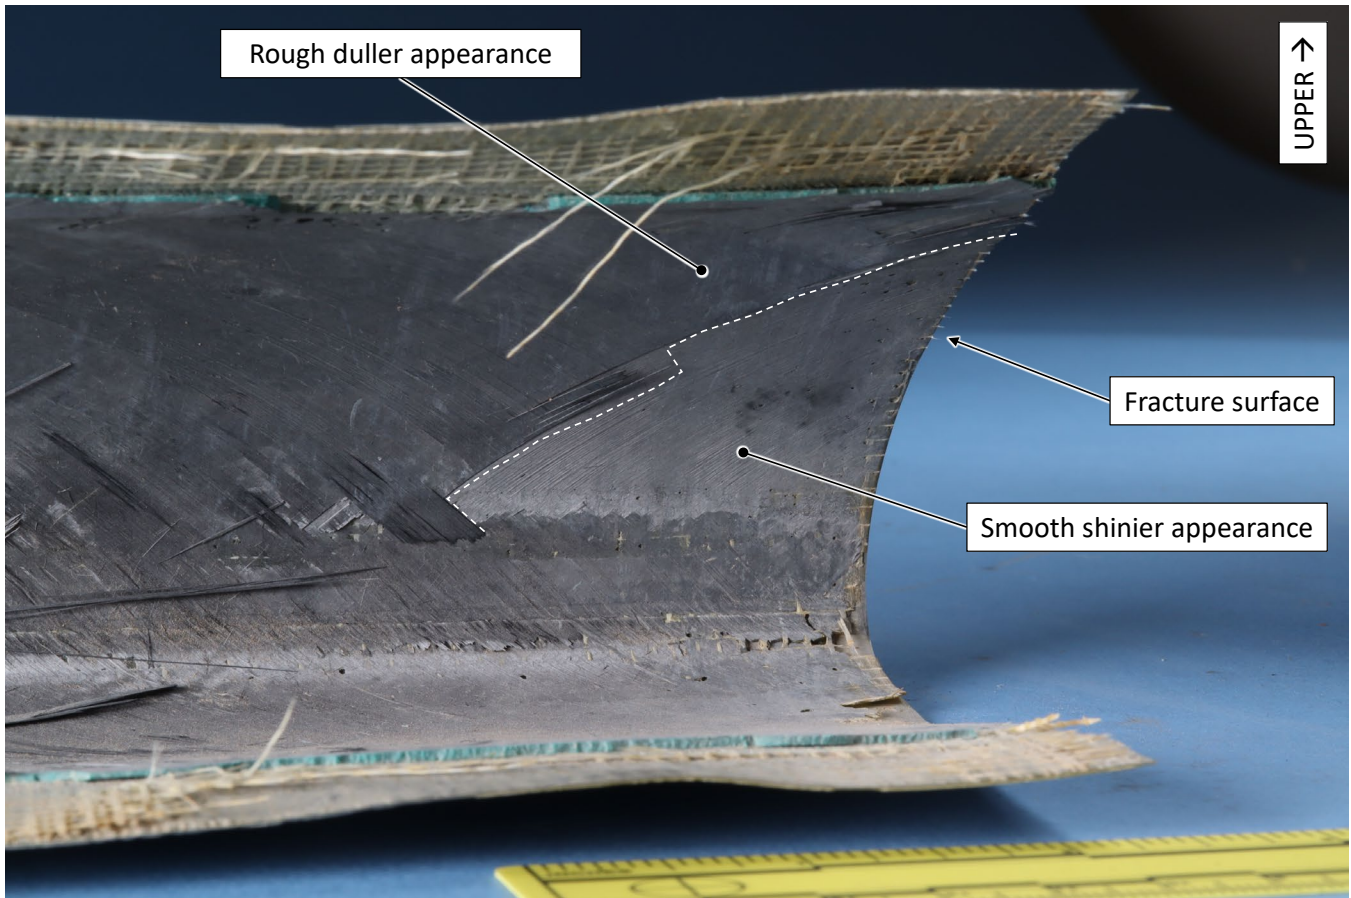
A photograph of the internal adjacent surface of the inboard red blade leading-edge cap flat fracture after removal from the spar.
